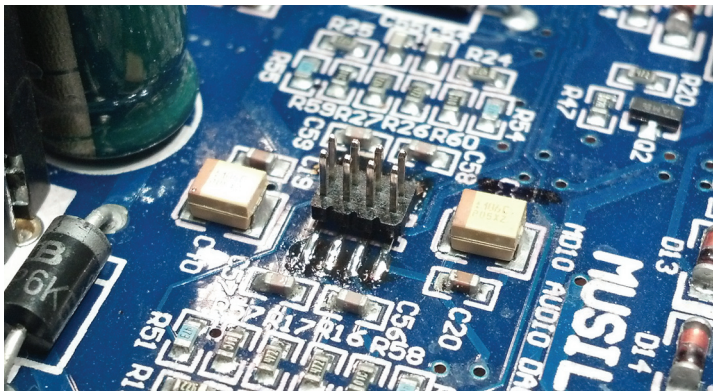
(Above) 0.050 2x4 pin header soldered to the existing PCB pads.
